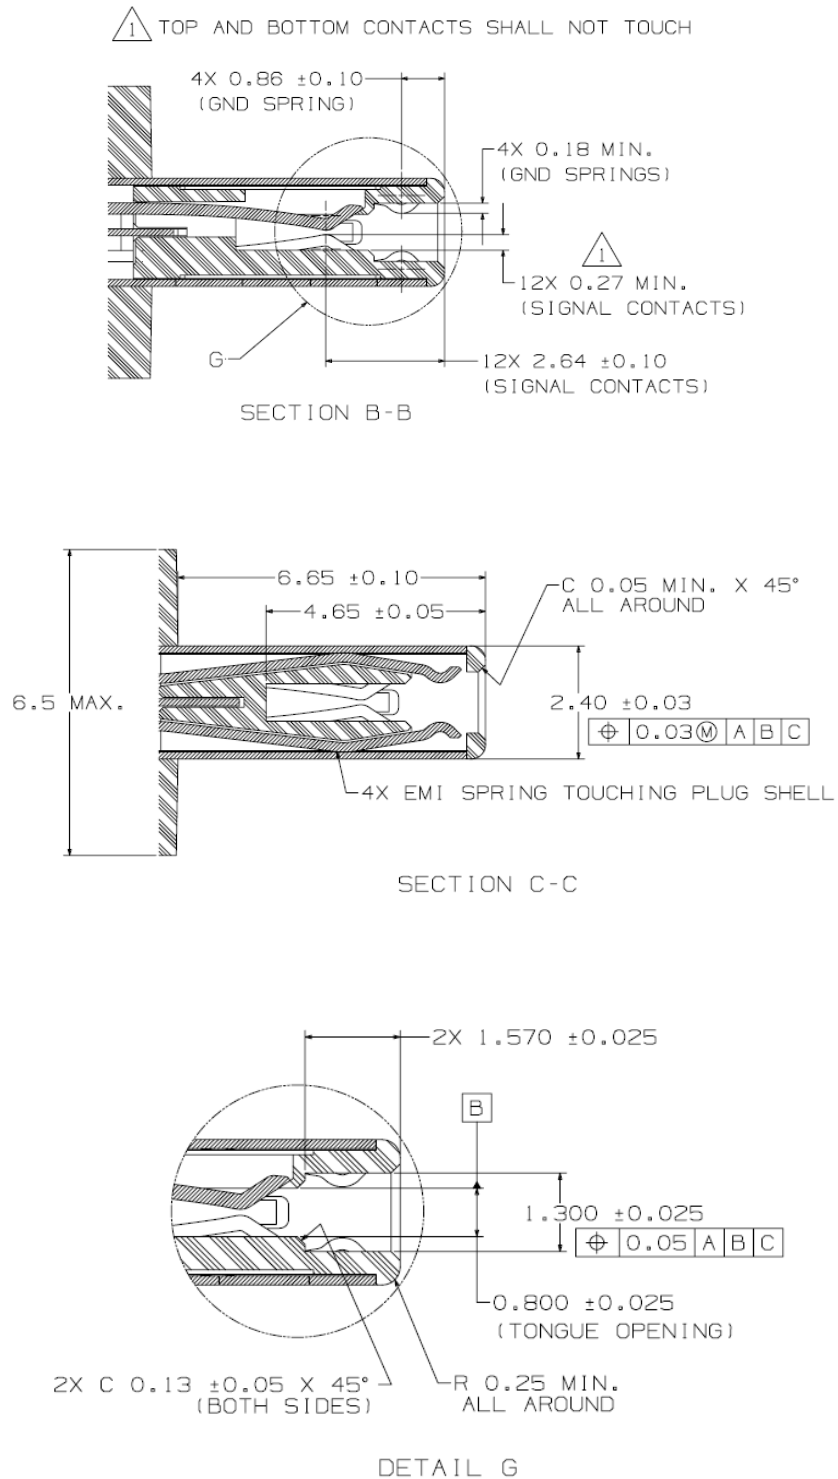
USB 2.0 Type-C Plug Interface Dimensions, cont.
